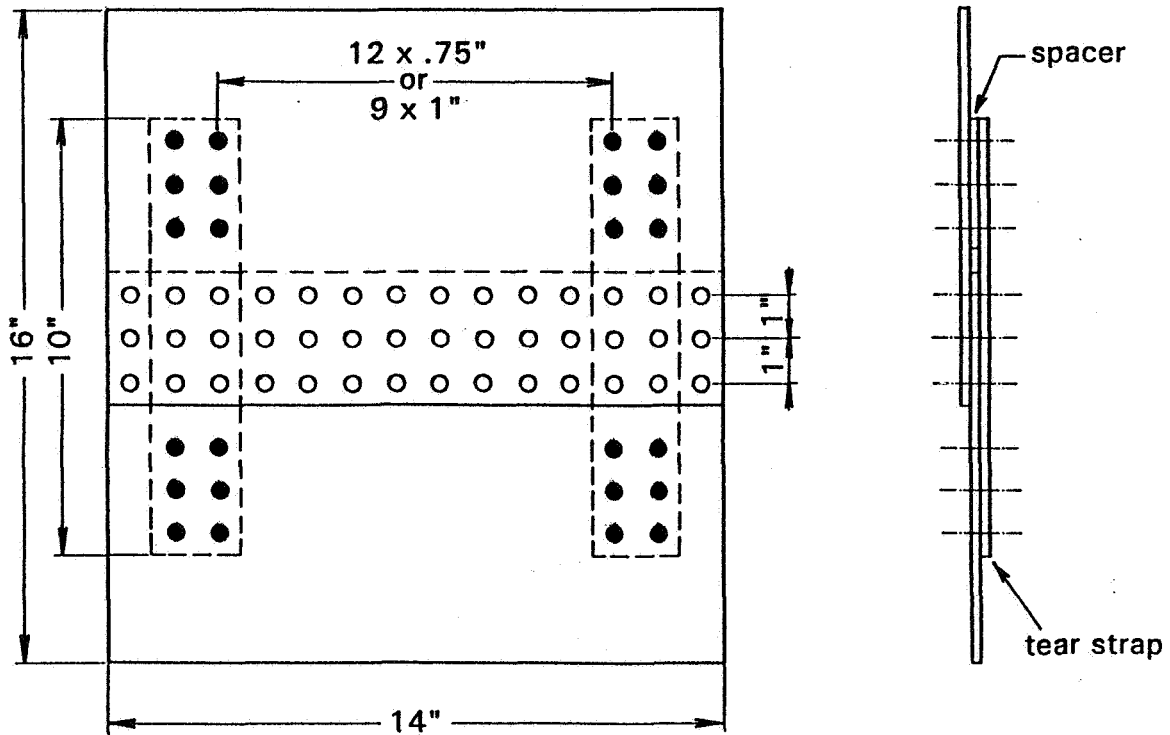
Geometry and dimensions (inches) of specimens (baseline design)
